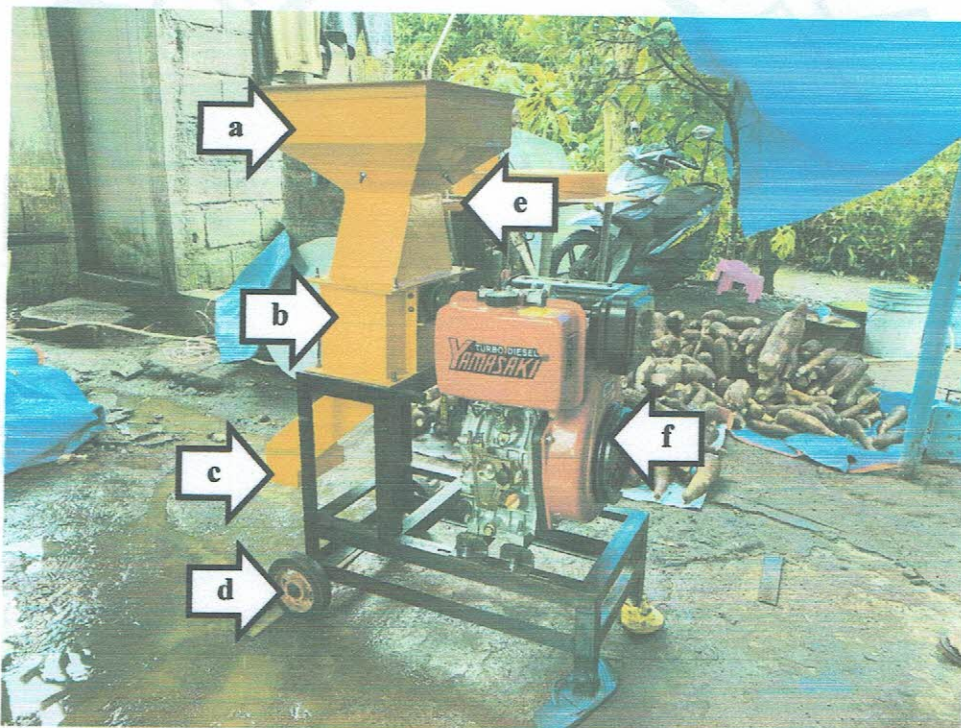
Parts of the ACPF HAMM2 Hammer Mill powered by 8.95 kW YAMASAKI BYK188FA Diesel Engine include the following: (a) Input hopper, (b) Milling chamber, (c) Output chute, (d) Transport wheels, (e) Feed intake adjustment, and (f) Prime mover.
